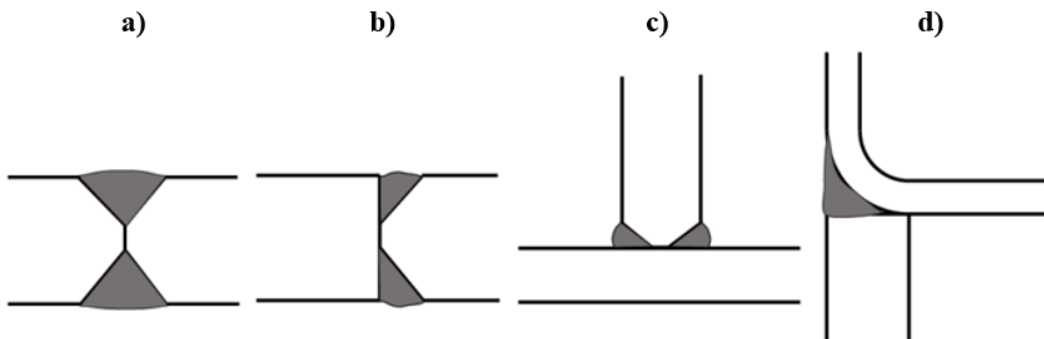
a) Double-bevel PJP Butt Weld, b) Single-Bevel Groove Weld, c) T-Type PJP Weld, d) FBG Weld [27].
